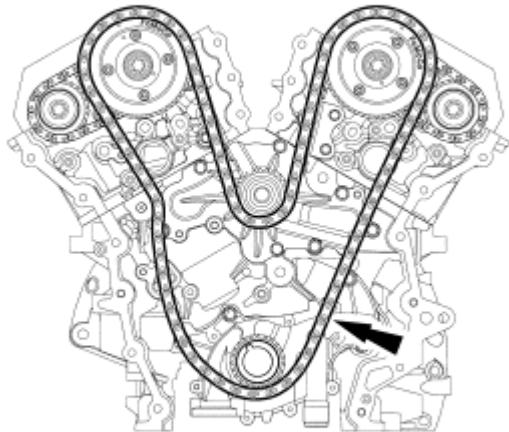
Locating Lower LH Primary Timing Chain Guide Bolts
